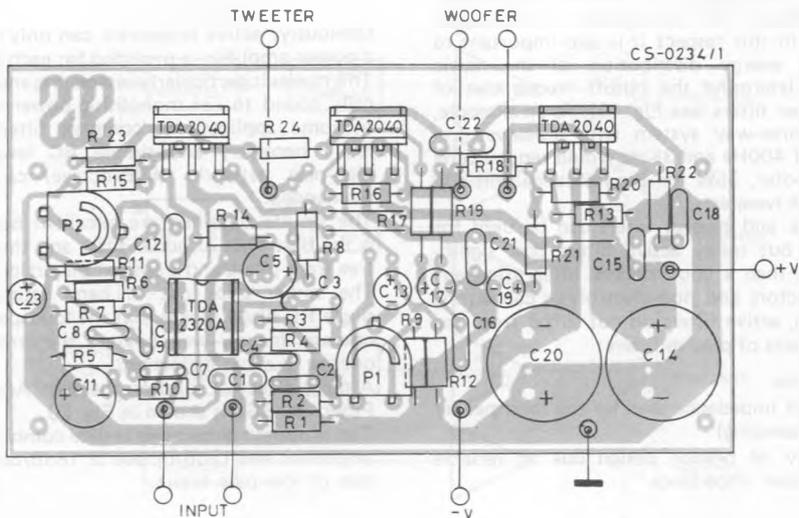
P.C. board and component layout of the circuit of fig. 16 (1:1 scale)
